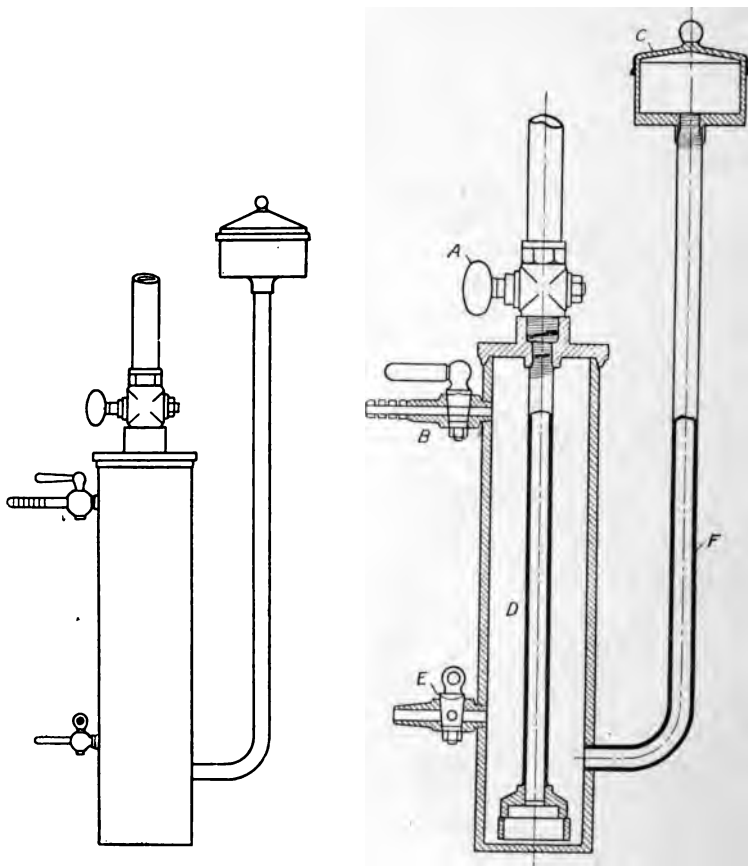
SAFETY VALVE, ELEVATION AND SECTIONAL.
